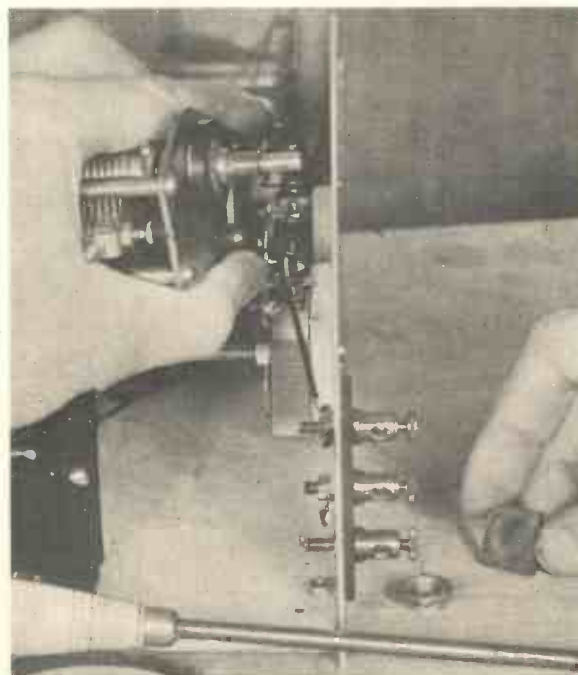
THE VARIABLE CONDENSER IS CLAMPED TO THE PANEL BETWEEN INSULATING WASHERS.
